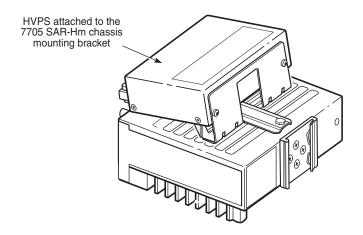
Attaching the HV-PS35 Mounting Bracket to the Chassis
